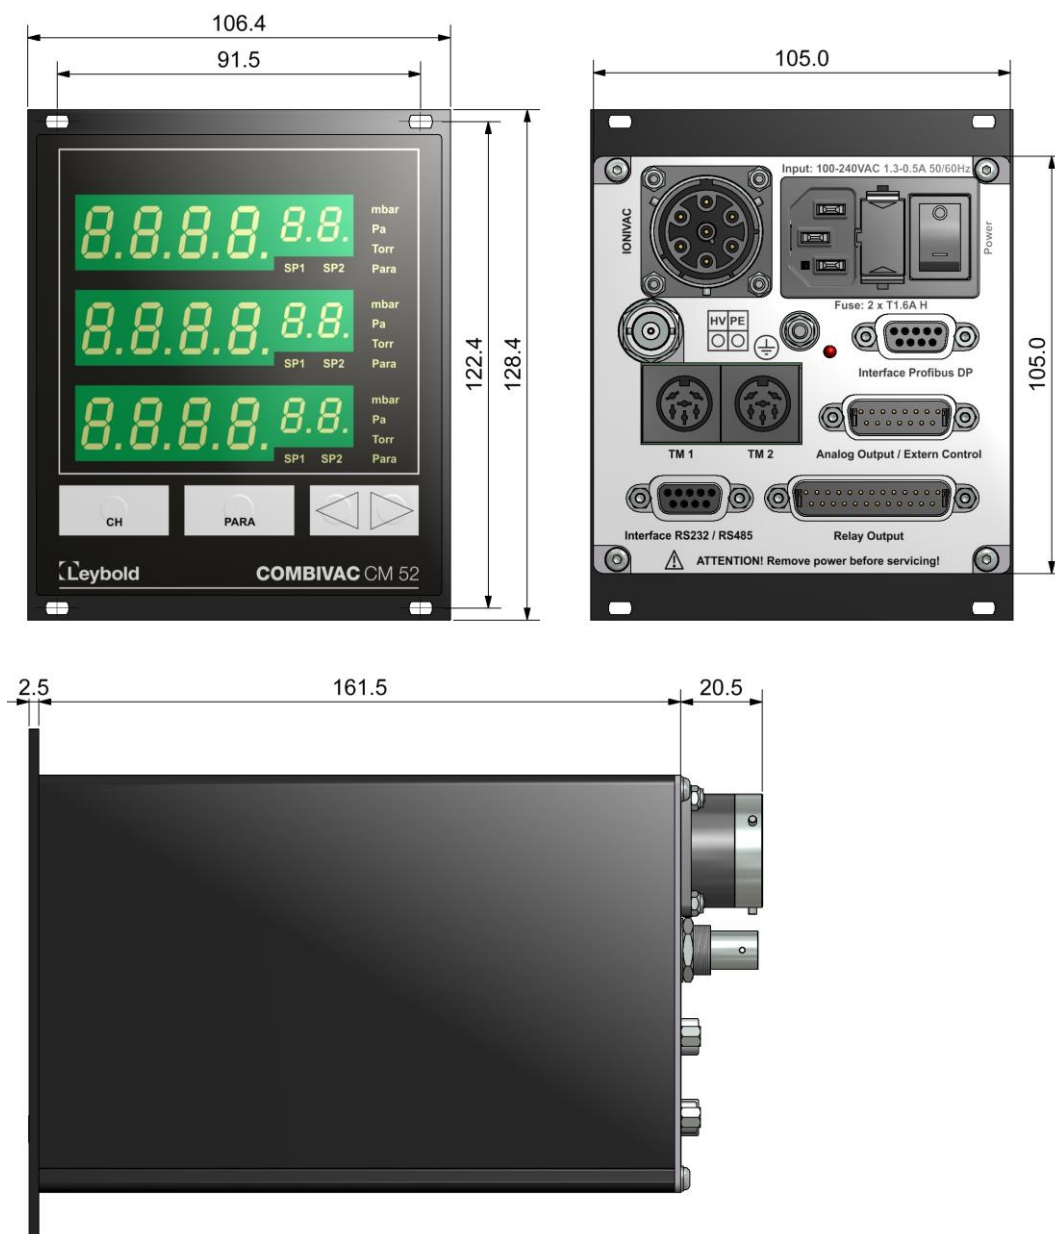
COMBIVAC CM 52 dimensions (in mm)
